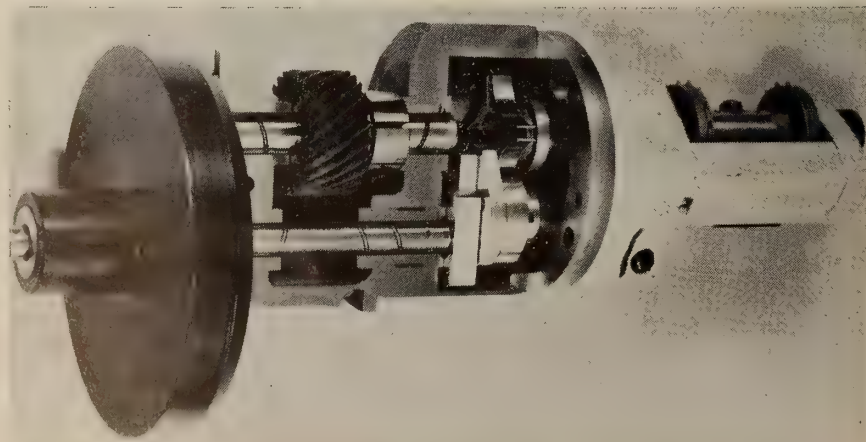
Cutaway of a Simplex X-L Hi-Speed intermittent showing the eccentrically driven cam. Note the heavy construction of the starwheel and its highly polished surfaces. These parts are machined to a tolerance of less than 0.0001 inch!
